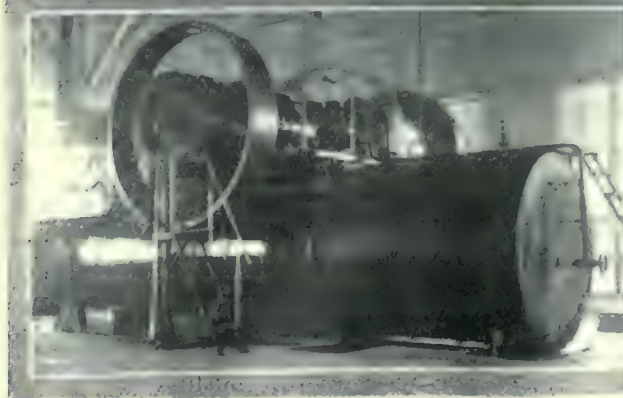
SUPER-HEATER AND SYNCHRONIZING MECHANISM.
